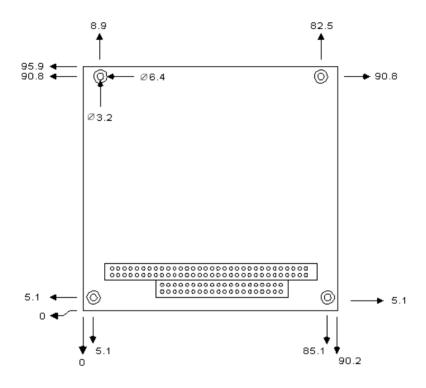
PC/104 module dimensions (mm) (±0.1)
